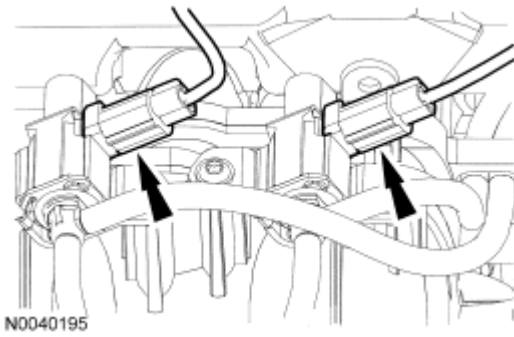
Locating Swirl Control Valve Electrical Connectors
